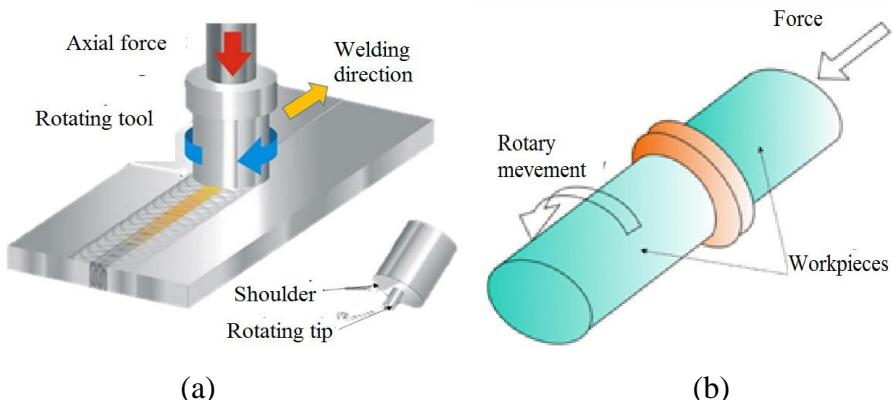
Friction-stir welding (a) and friction rotating welding (b)
